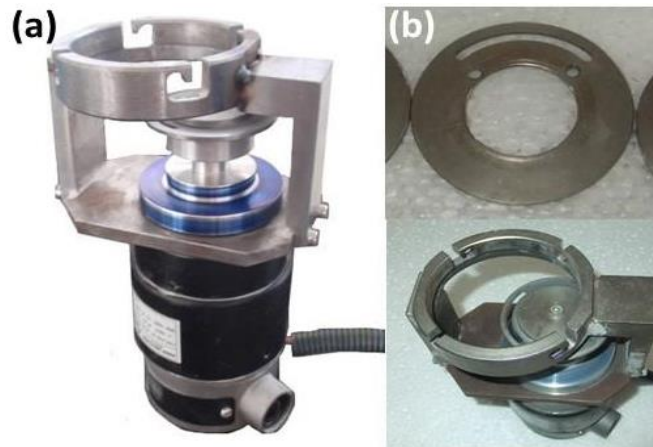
(a) Double disk assembly and (b) upper disk of the assembly.
